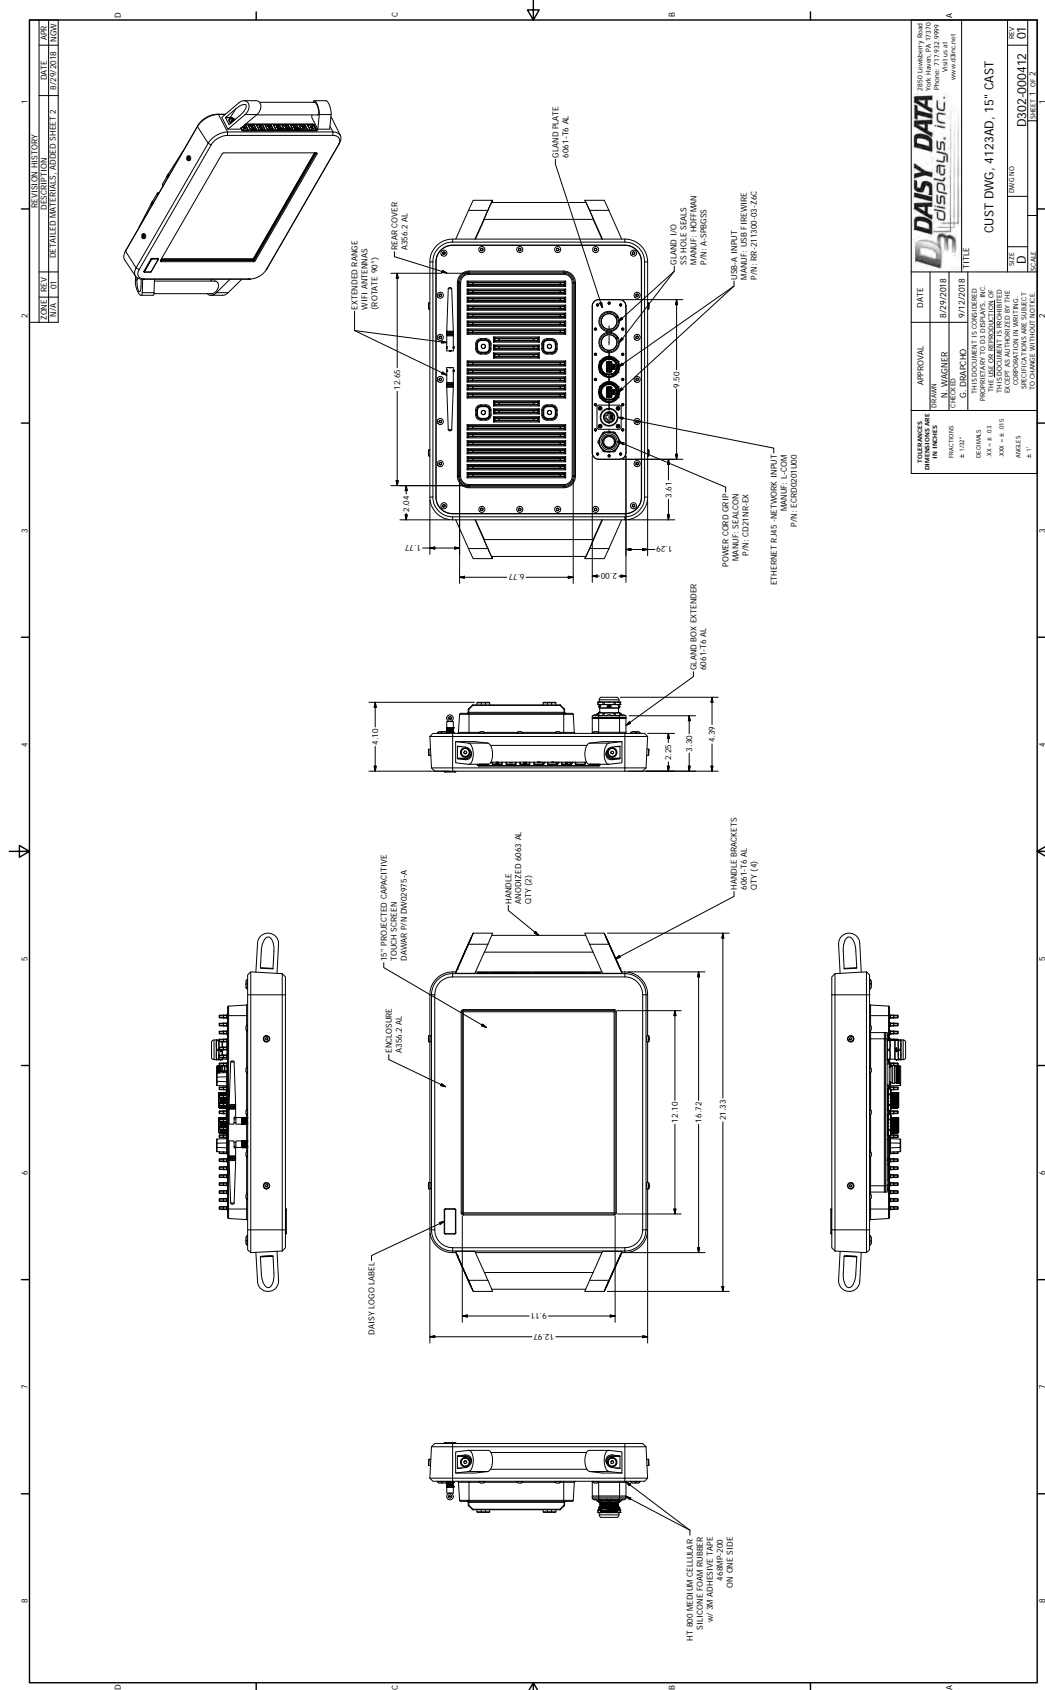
Model 4123AE Mechanical Drawing (1 of 2)
